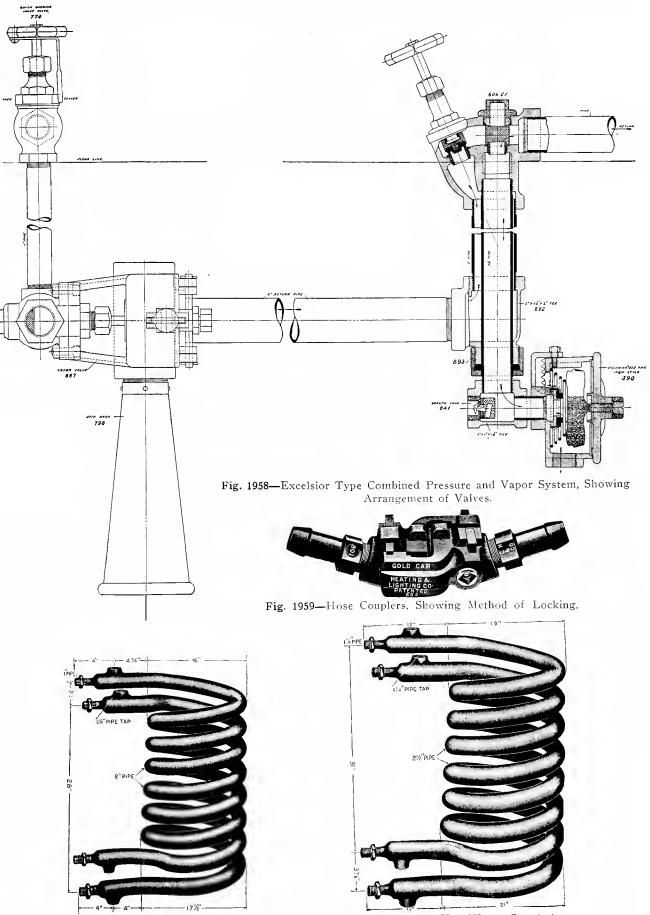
Improved Double Duplex Coils with Welded Ends, for Hot Water Circulation.
